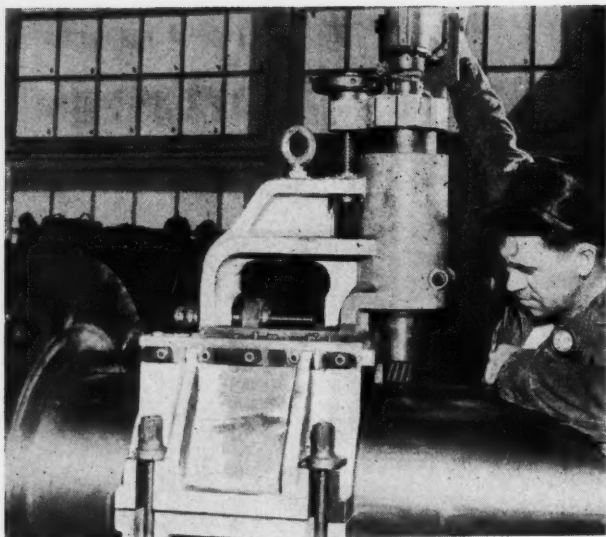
Milling Keyways in the Crankshafts for Eccentrics, Using a Portable Milling Machine
